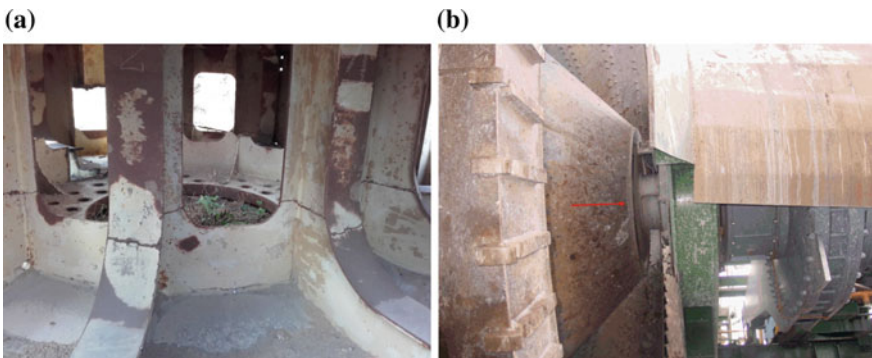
Damaged areas of bucket wheels in excavators: a SchRs 4600 and b KWK 1200M
